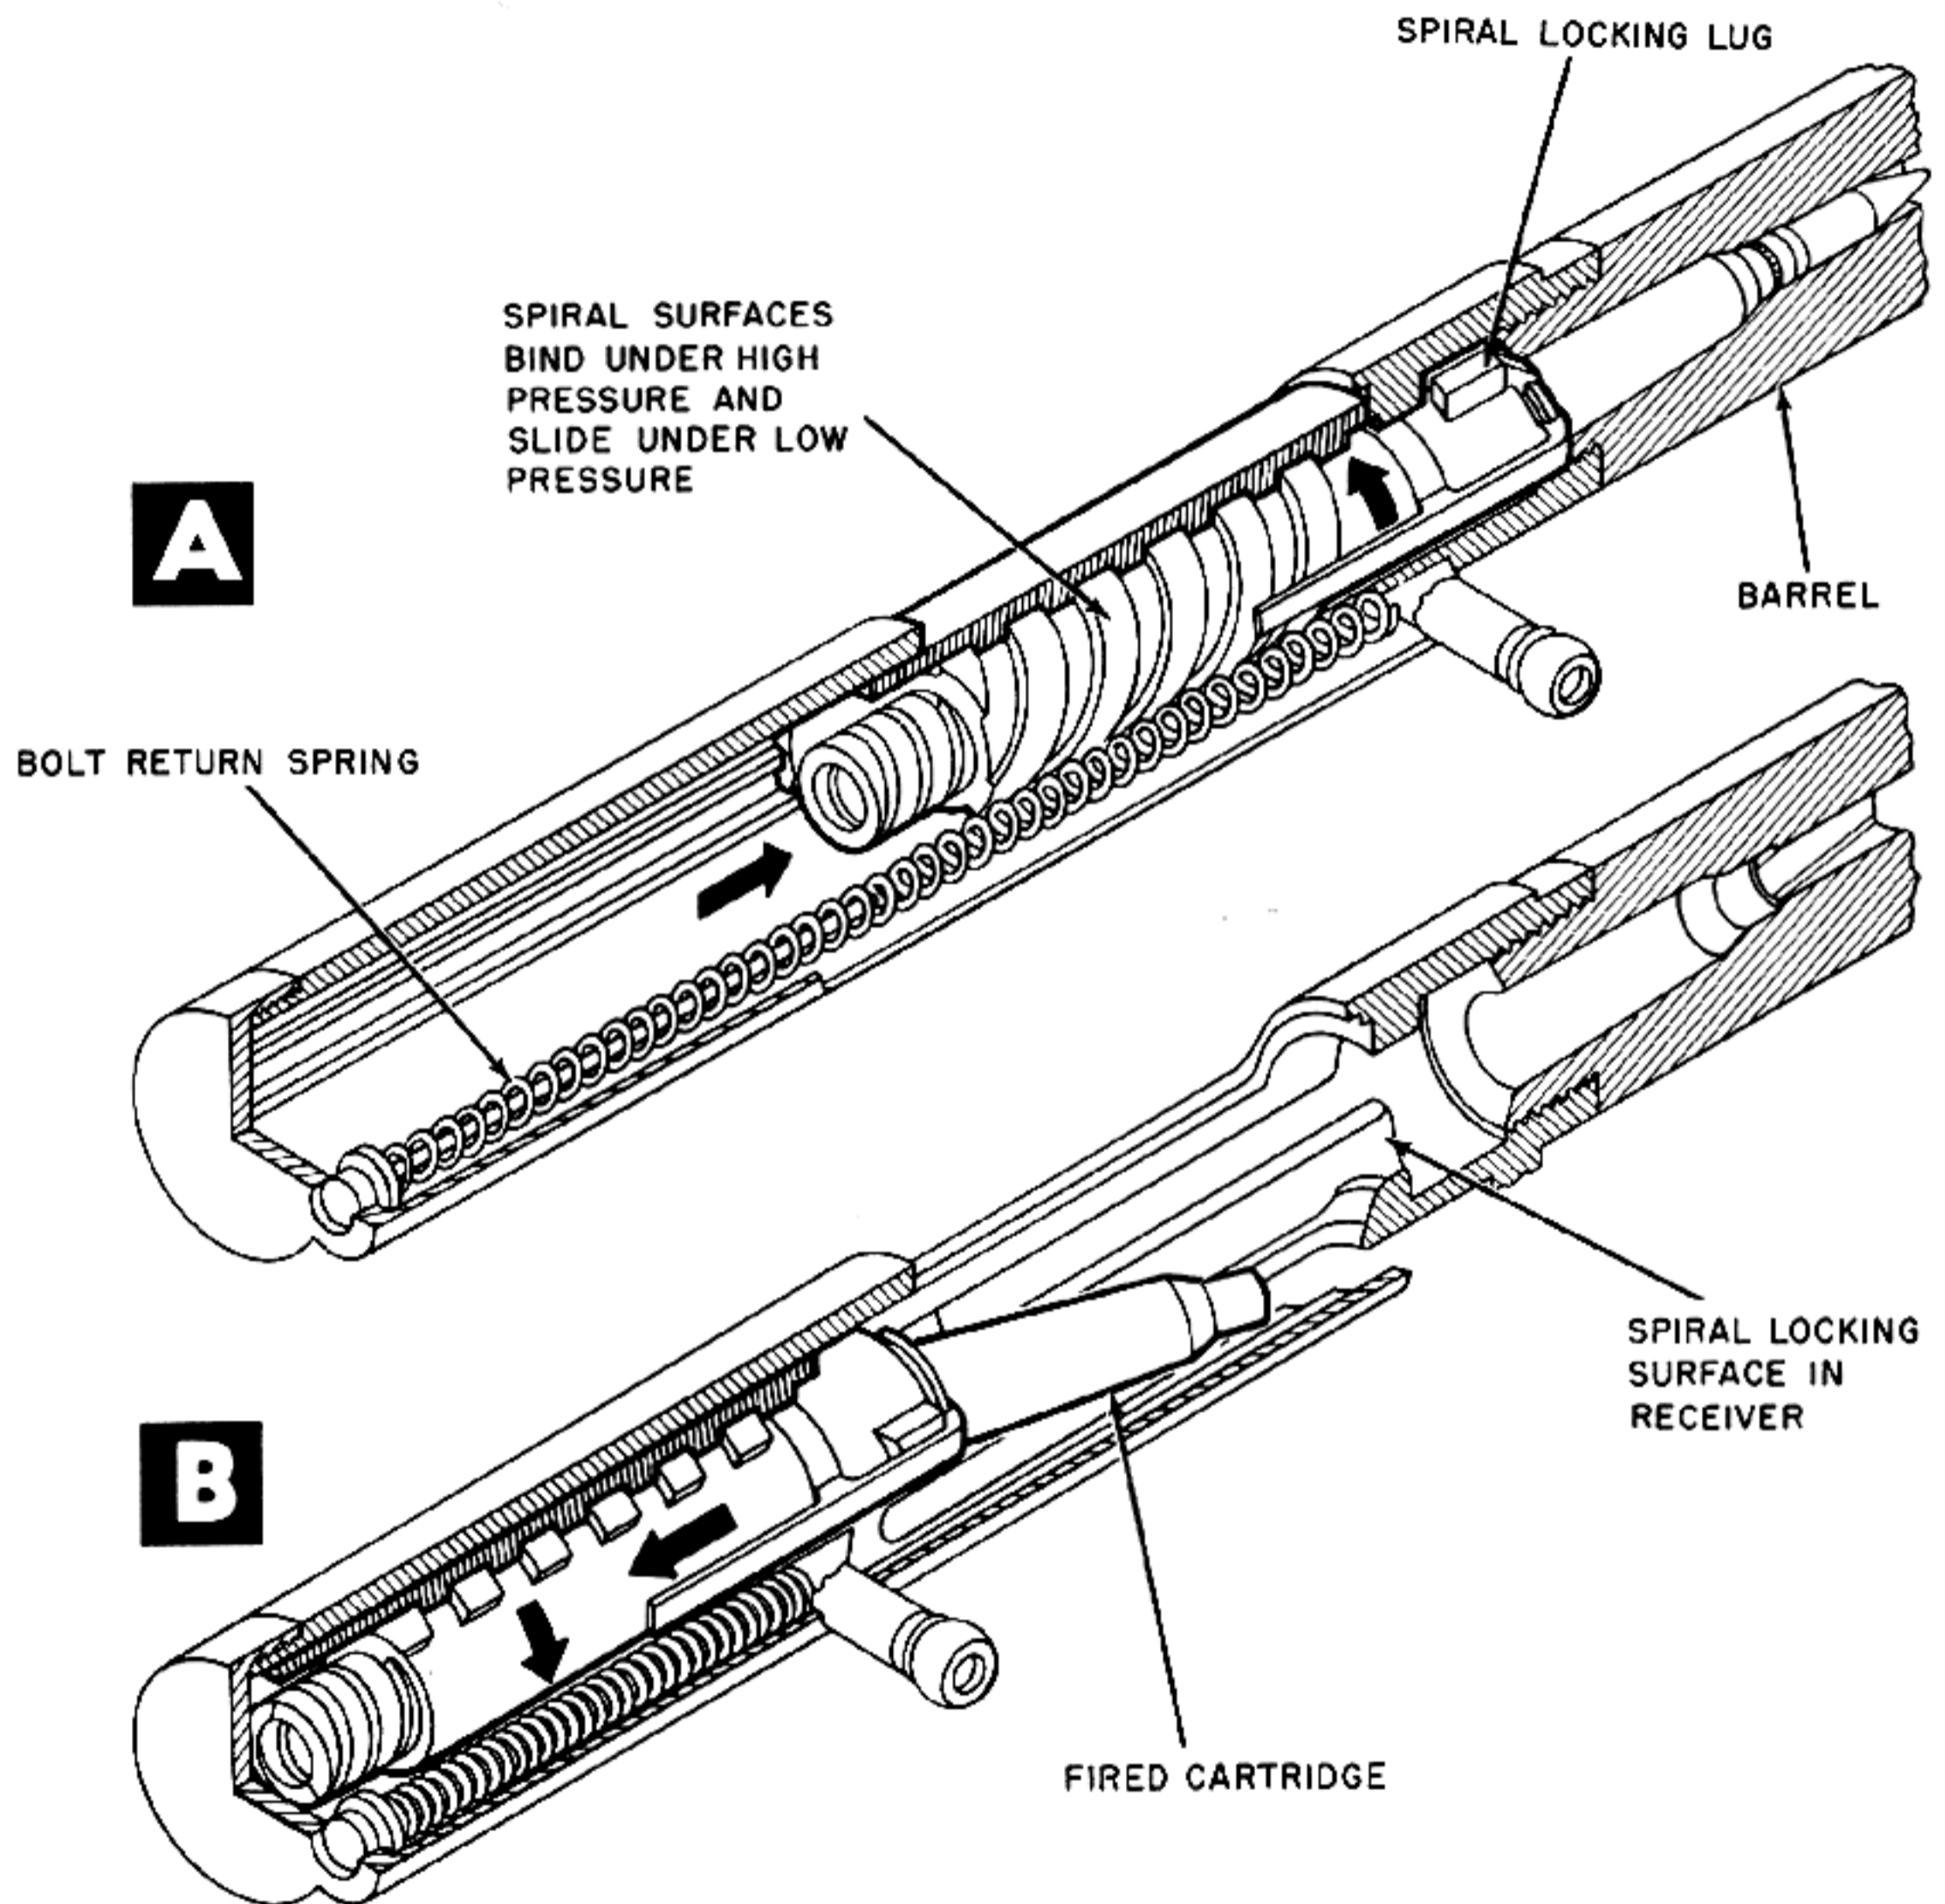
High Gas Pressure Causes Spirals To Bind. When Pressure Lowers, Spirals Slide, Unlocking the Bolt.
